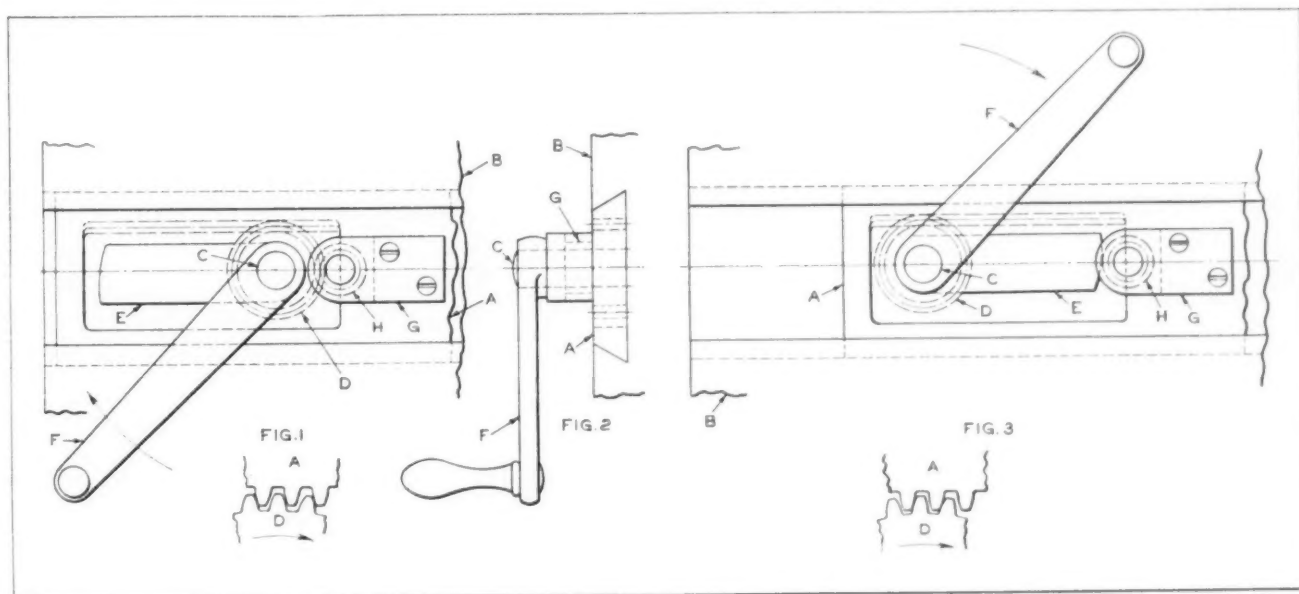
Rack and Pinion Mechanism with Rack Member *A* Withdrawn from Clamping Position. Fig. 2. End View of Mechanism Shown in Fig. 1. Fig. 3. Member *A* Locked in Clamping Position by Bar *E
